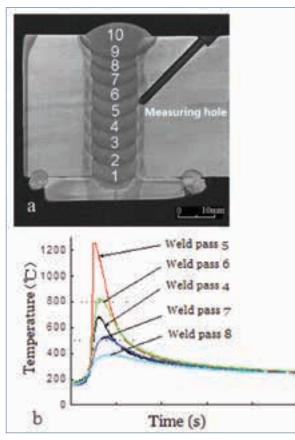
The heating cycles measured at Weld pass 5 during welding.
